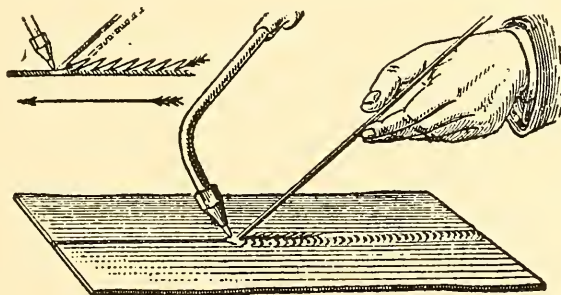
Rod Movement When Welding Thin Metal.
